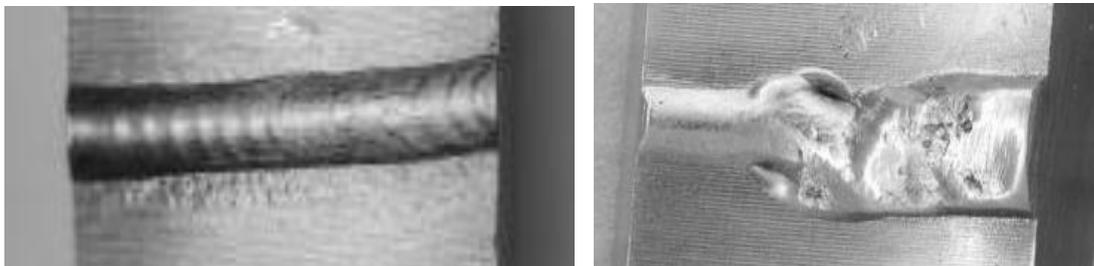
To the left, root of specimen SD 9, free of defects and passing corrosion test. To the right, root of specimen SD 15, showing defects and not passing corrosion test.
